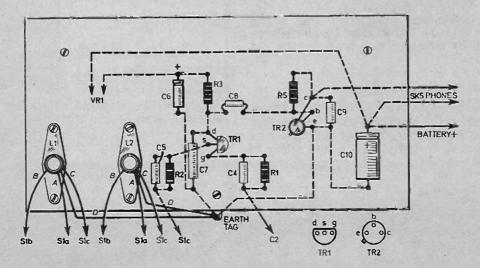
Layout and wiring of the component mounting board. Connections shown by broken lines are made on the underside of the board.
